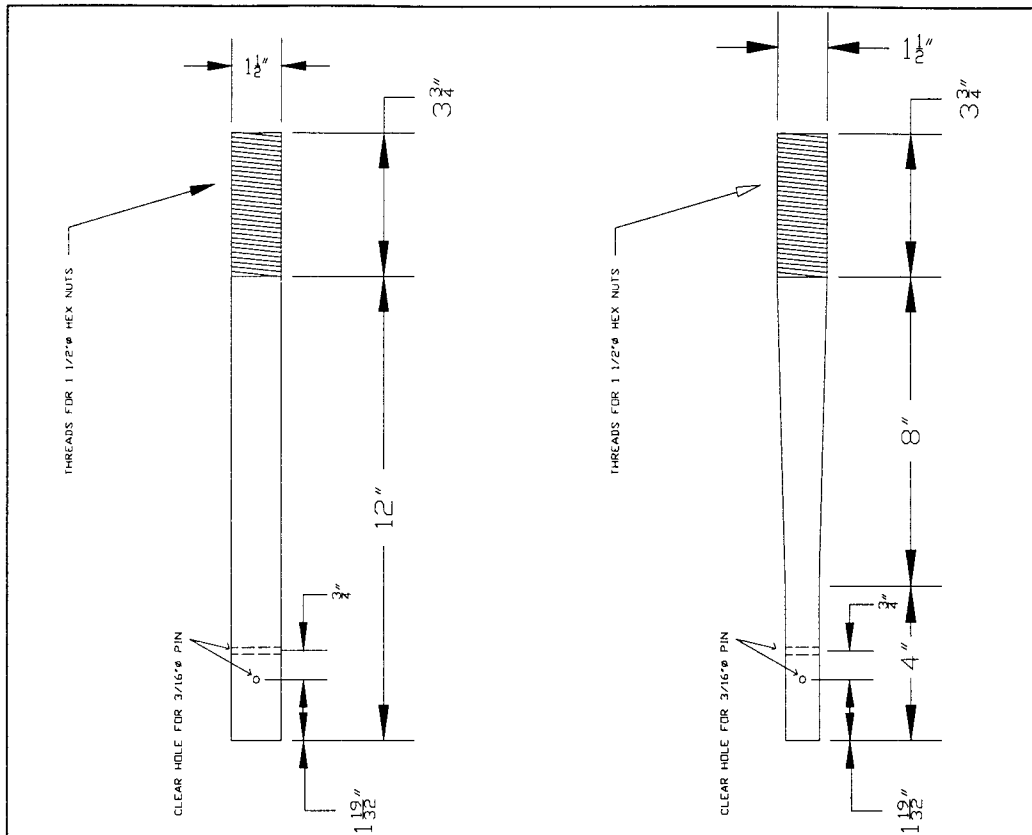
Damper Rods of Full-Scale Damper: Straight and Tapered
